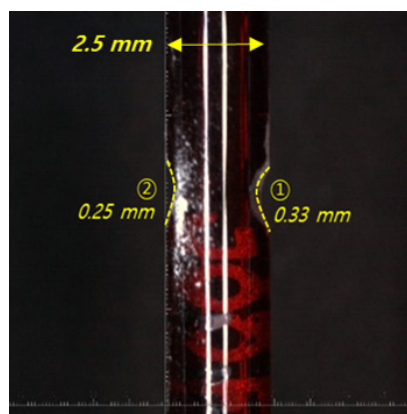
Double defects of 0.33 mm and 0.25 mm damage.
